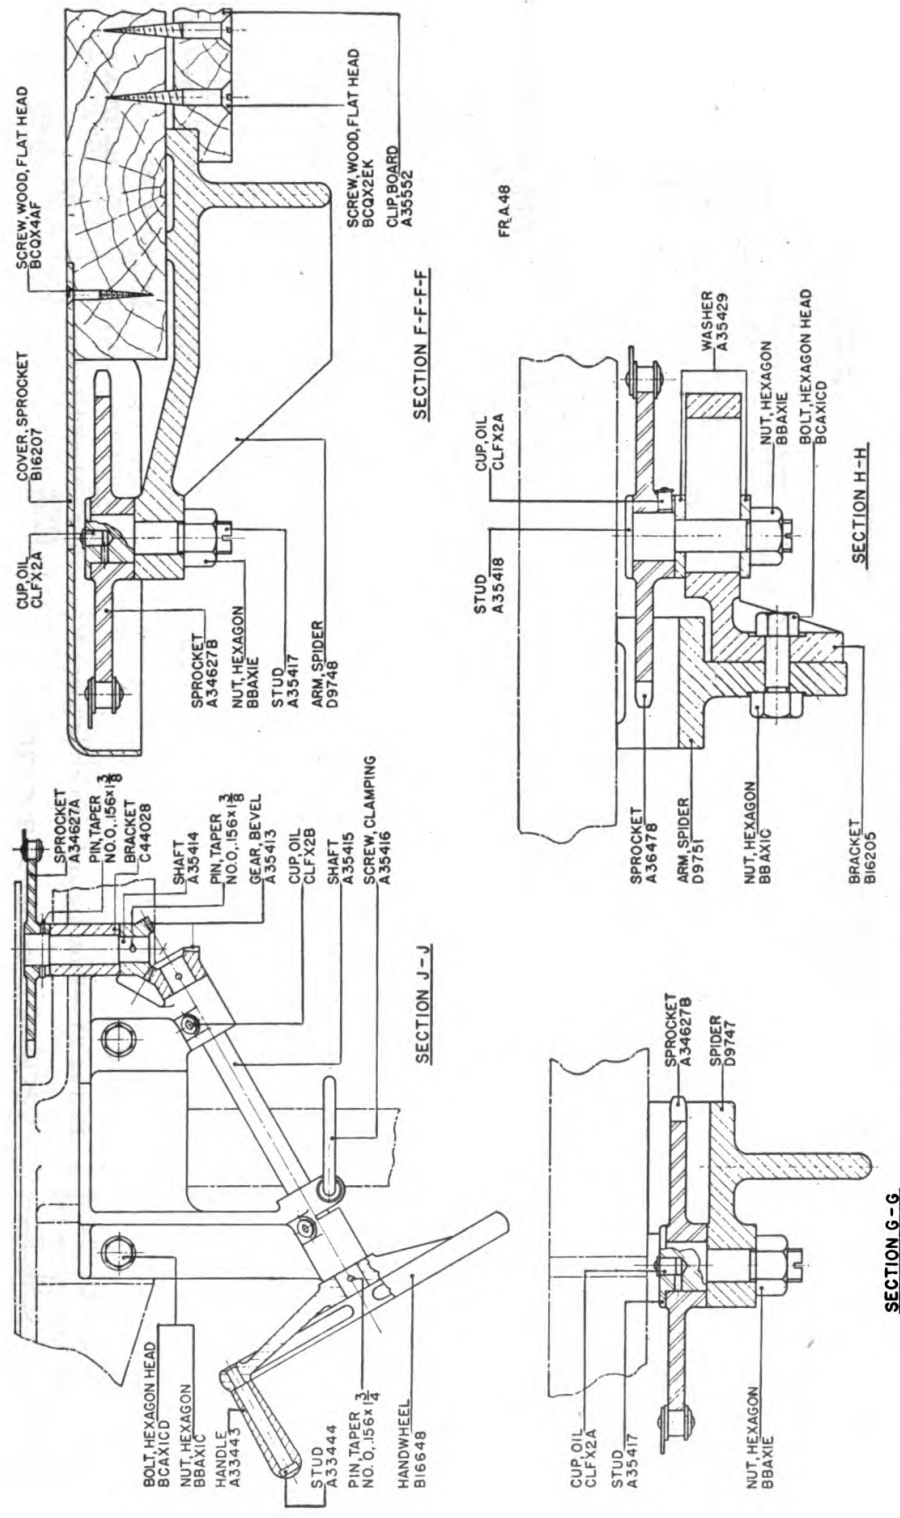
Plotting and relocating board M1—sectioned views.
